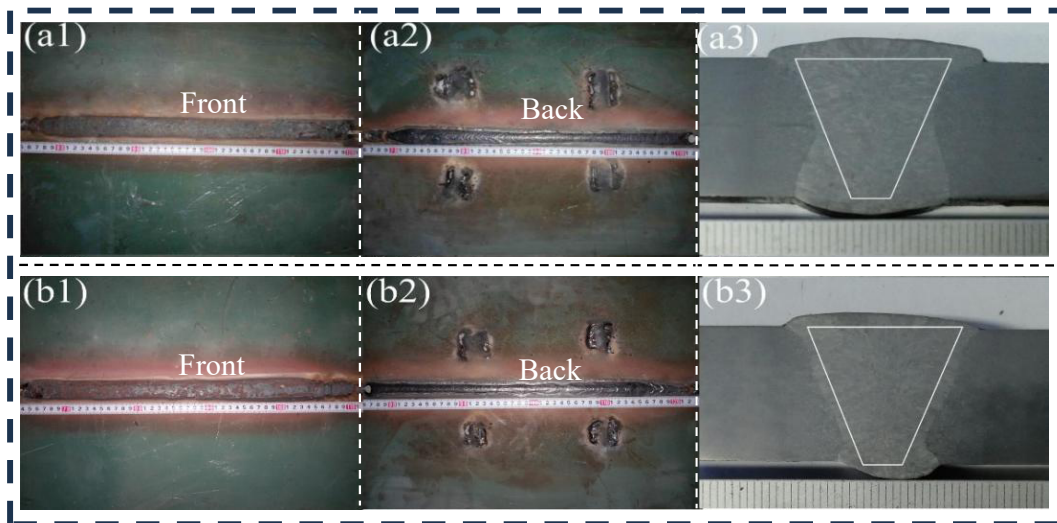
Macroscopic morphology of welded joints between two EGW welding processes: (a1) Seven-wire front weld seam; (a2) Seven-wire back weld seam; (a3) Macroscopic morphology of seven-wire weld seam; (b1) Single-wire front weld seam; (b2) Single-wire back weld seam; (b3) Macroscopic morphology of single-wire weld seam
